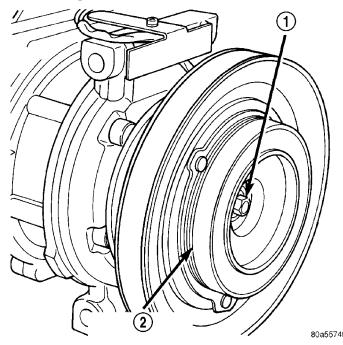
COMPRESSOR SHAFT BOLT AND CLUTCH PLATE
